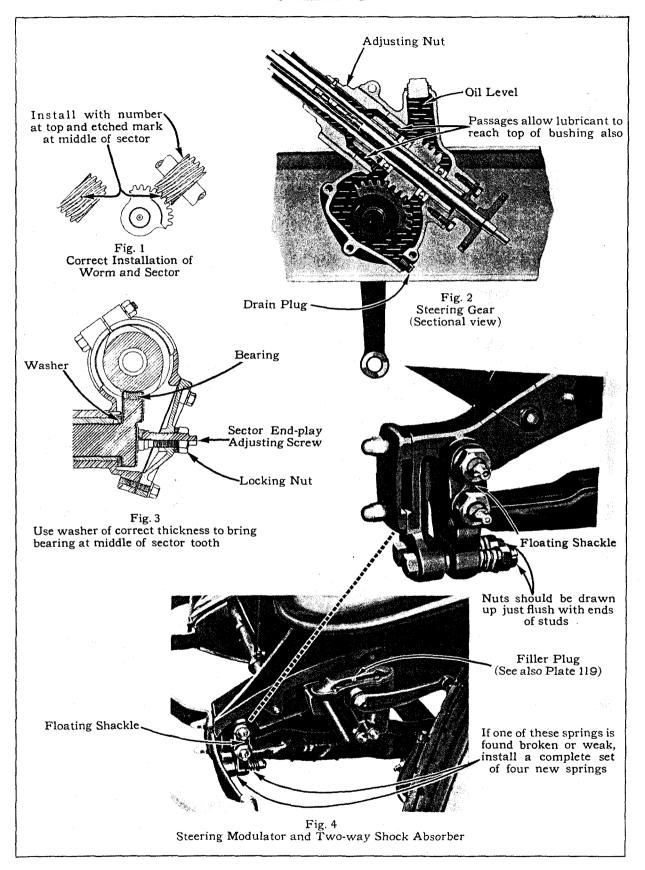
Steering Gear and Steering Modulator Cadillac 353—La Salle 340
